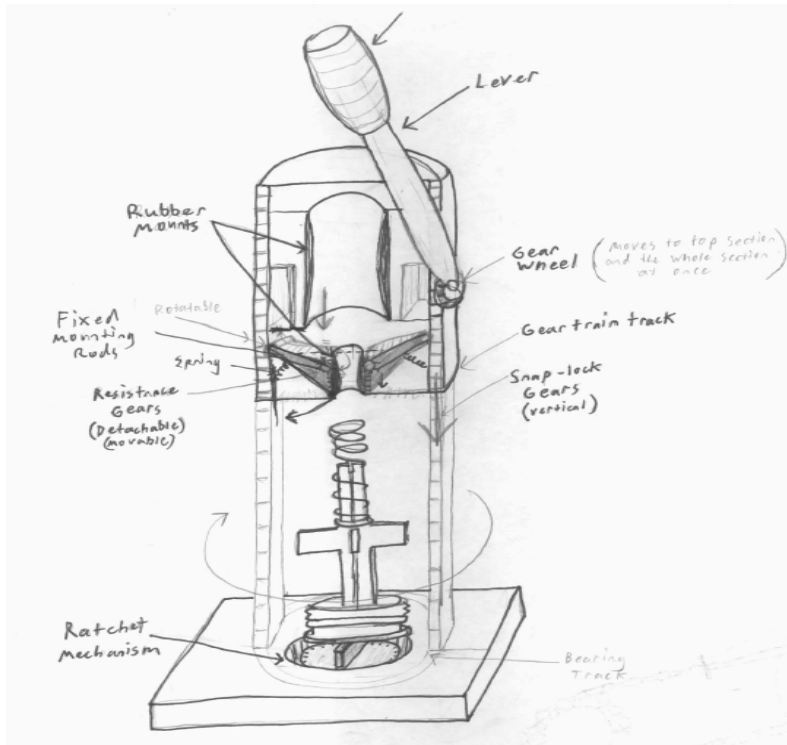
Design 1, Concept for a One-Step Assembly Jig
